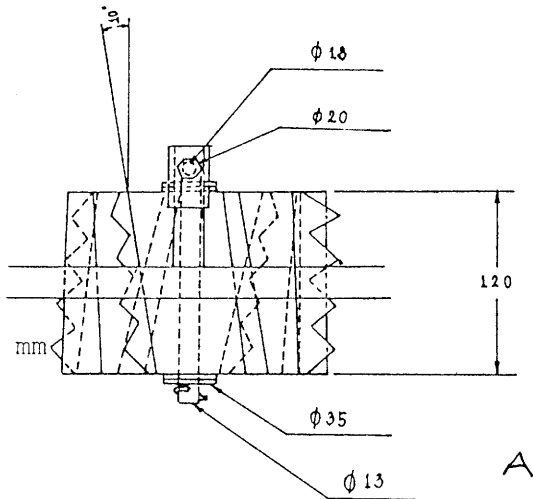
Cylindrical type roller (scale 1 : 5, dimensions in millimeter)
